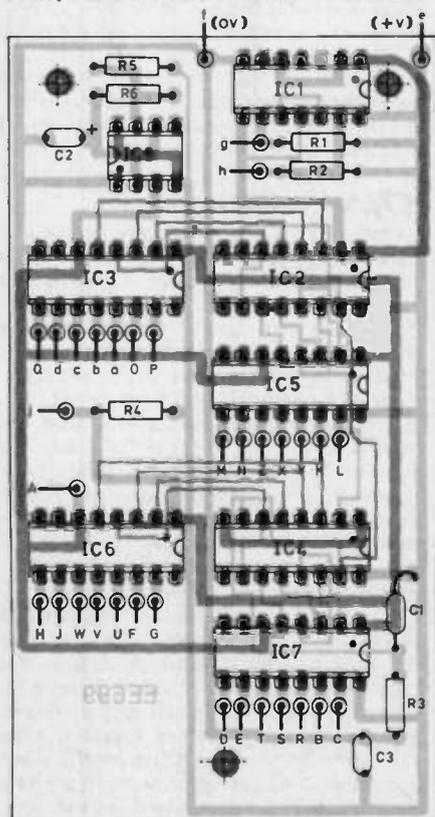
Component layout on the Counter double-sided printed circuit board.
